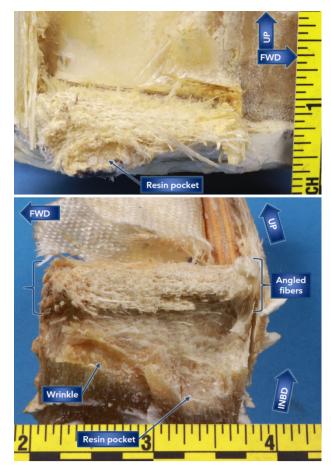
Inboard side (upper image) and oblique view of the outboard side (lower image) of the right-wing main spar lower cap fracture.
